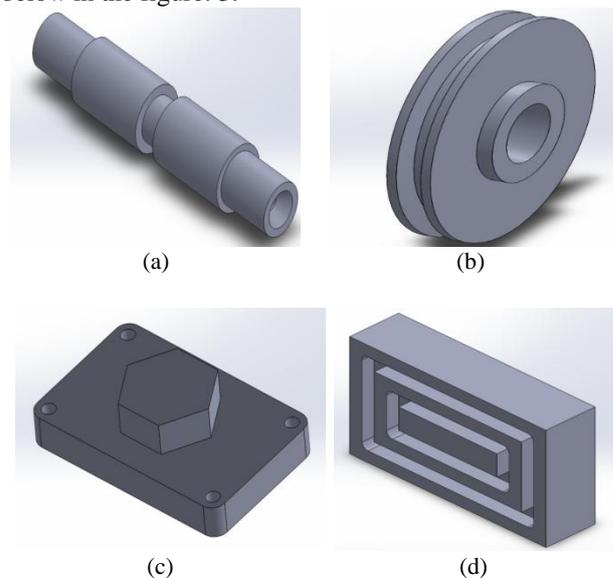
Those parts will be machining on lathe and milling in FMC cell (a)first turning part (b)second turning part (c)first milling part (d)second milling part.
